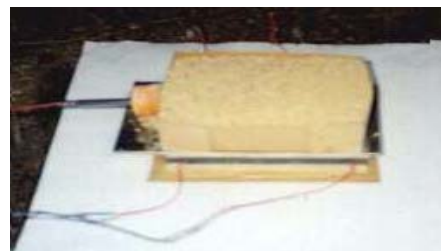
Lateral angle of the experimental assembly used for the process of plating through explosion
